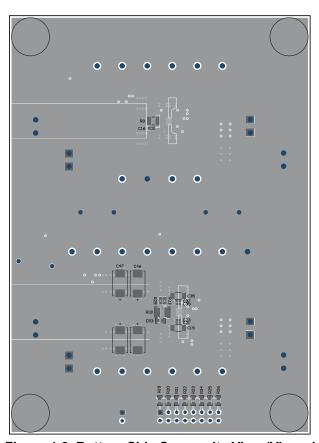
Bottom-Side Composite View (Viewed From Bottom)
